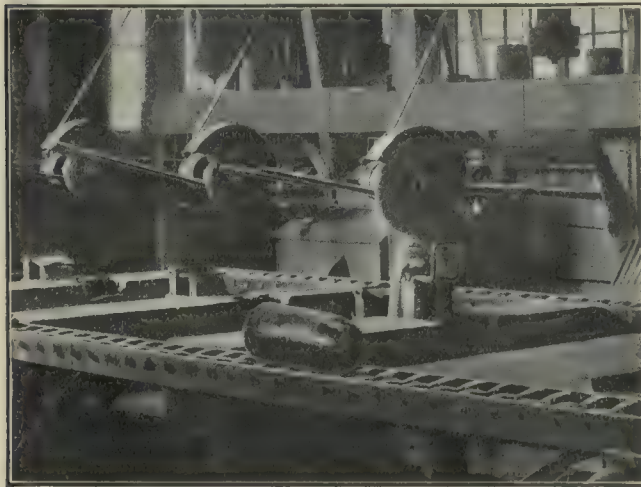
APPARATUS FOR GRINDING OUT DEFECTS
